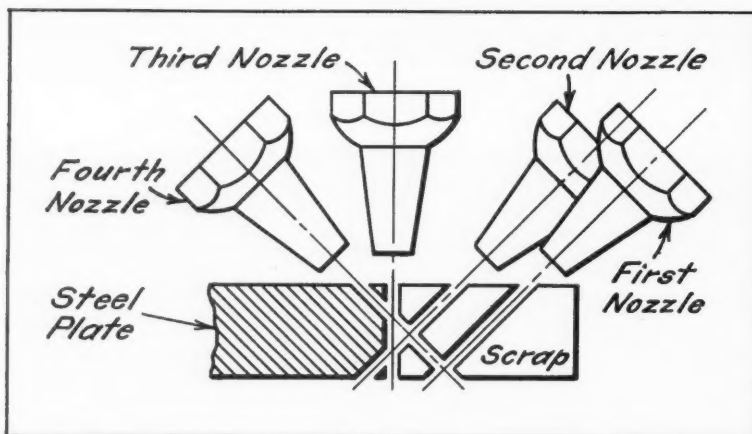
Four-nozzle arrangement for producing a double bevel and flat nose on the edges of steel plates
